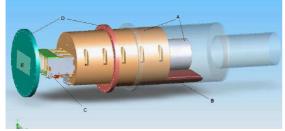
The exploded view of the in-pile plug assembly (A: Plug, B: Base Table, C: Cassette, D: New Flange & Ring Flange, E : Window Flange)
